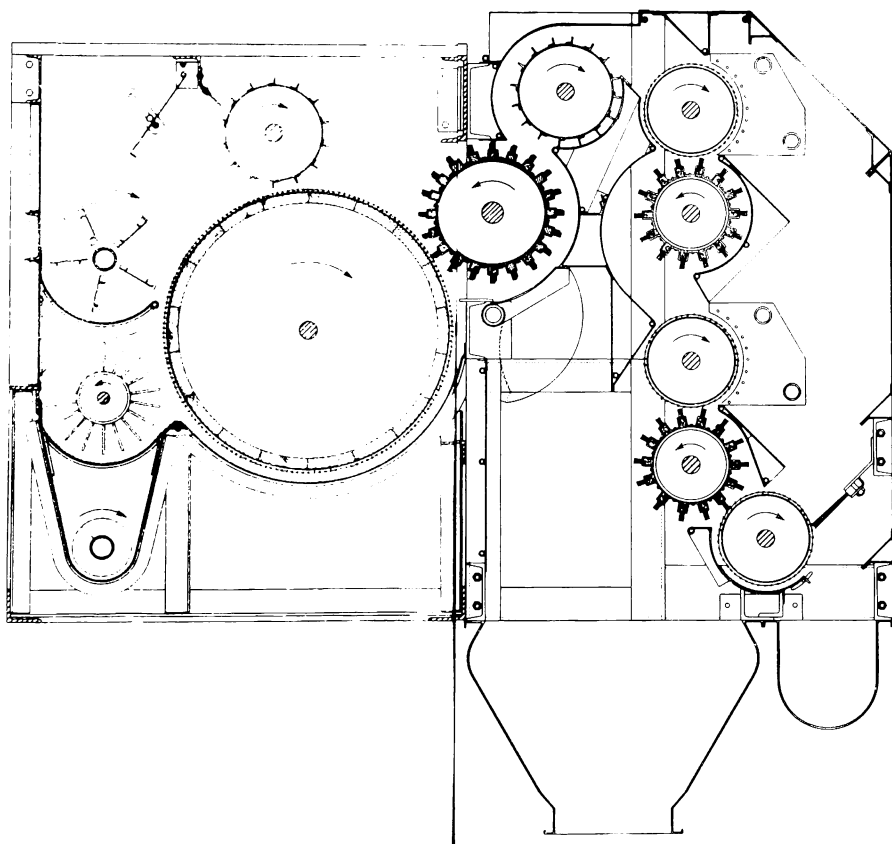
Cross section of bur machine (left) with stick remover attachment added (right).
